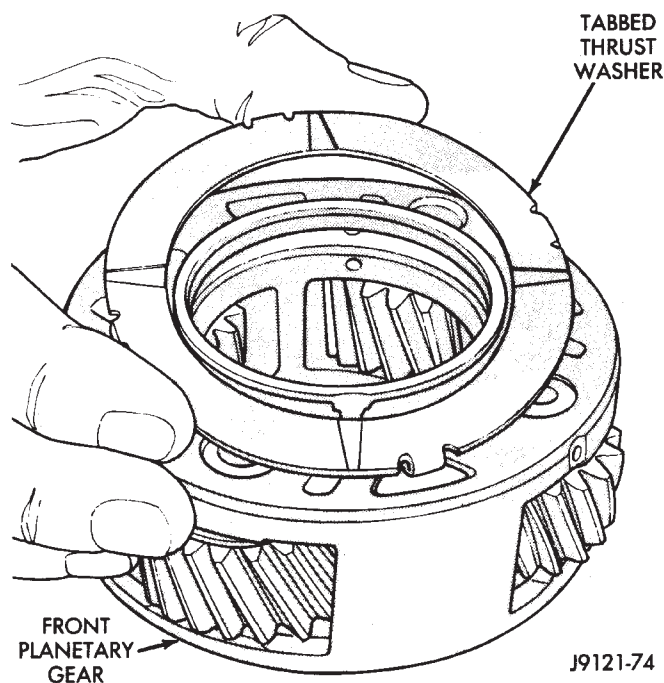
Installing Thrust Washer On Front Planetary Gear
